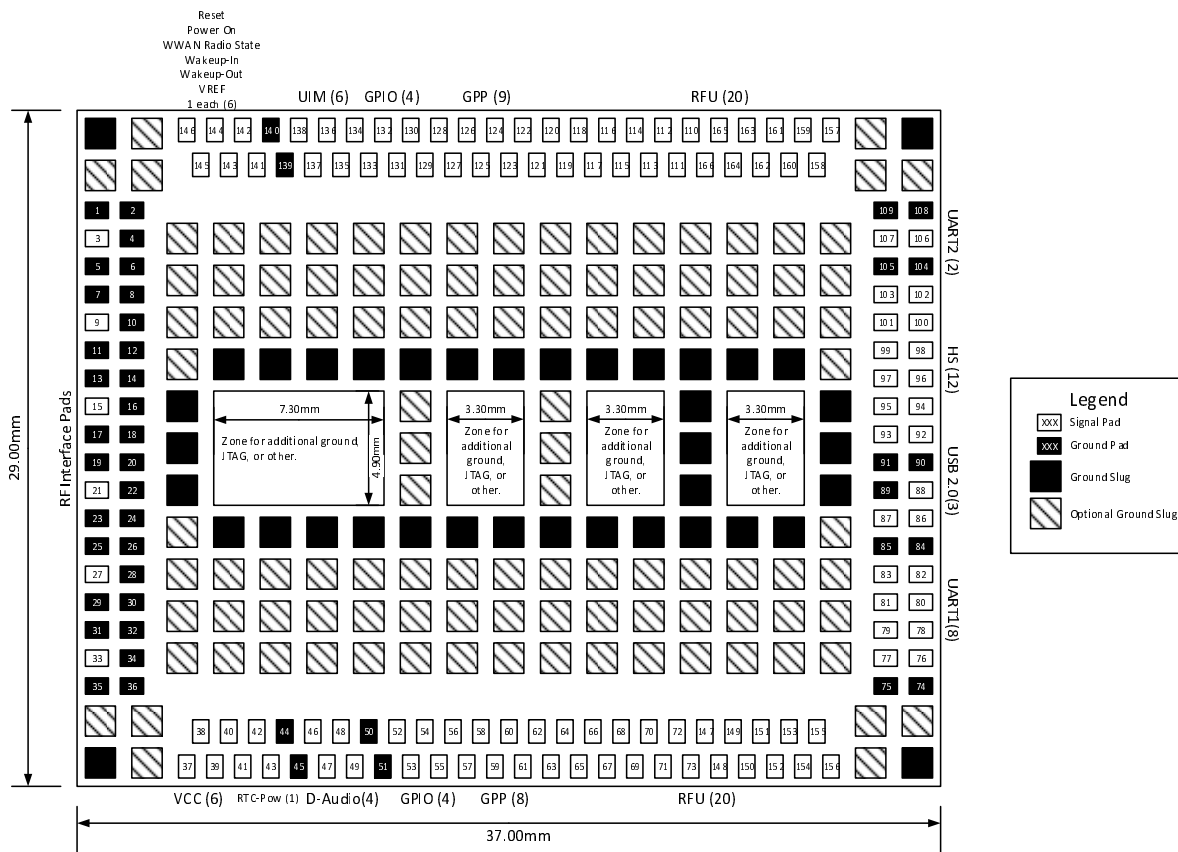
SMT3729 black and white physical form factor (1 073 mm<sup>2</sup>), dimensions, pad numbering and placement
